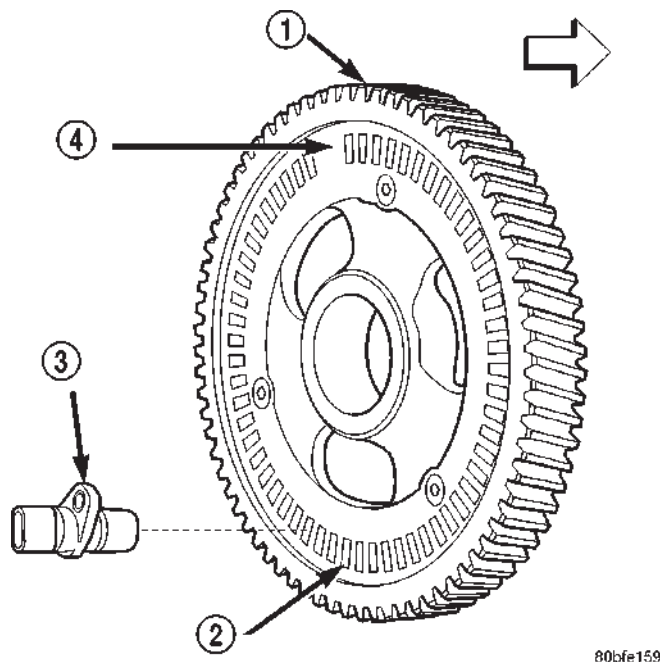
Notches at Rear Of Camshaft Drive Gear
